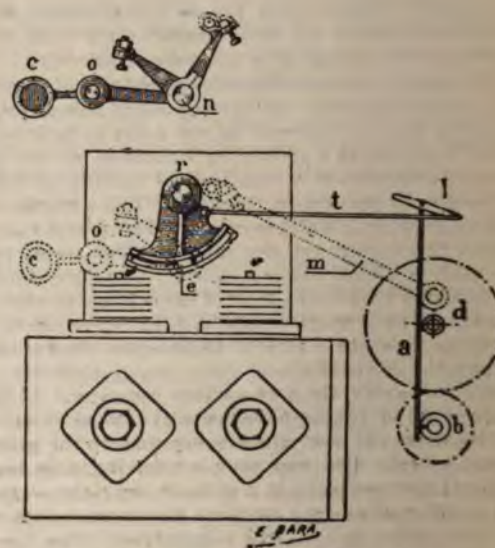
GOVERNOR MECHANISM OF ENGINE.
